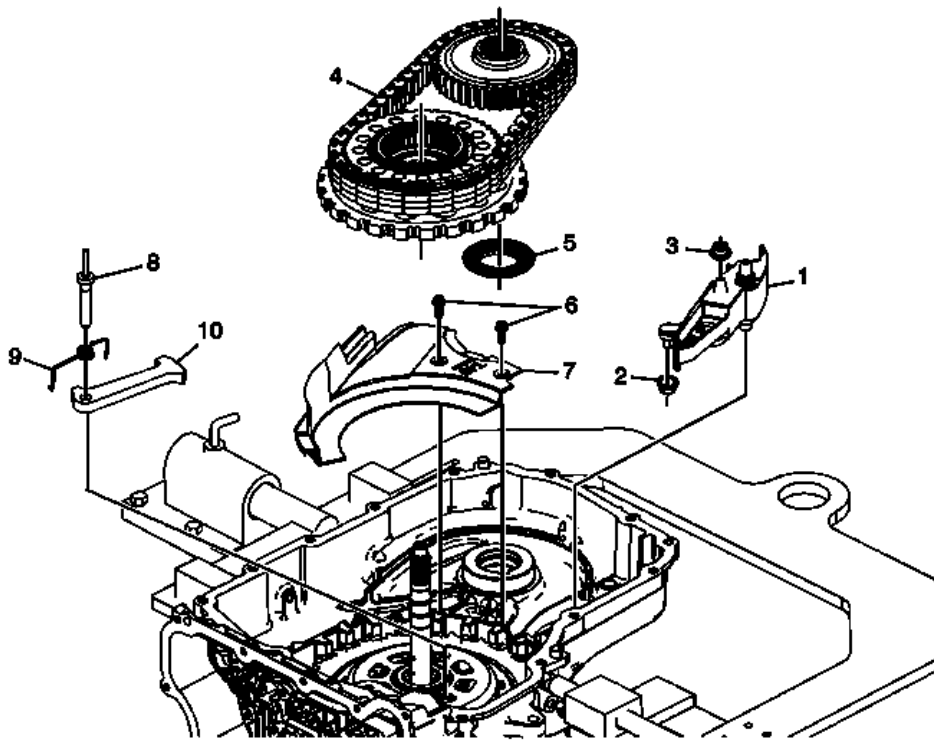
View Of Drive and Driven Sprocket, Drive Link & Park Pawl
